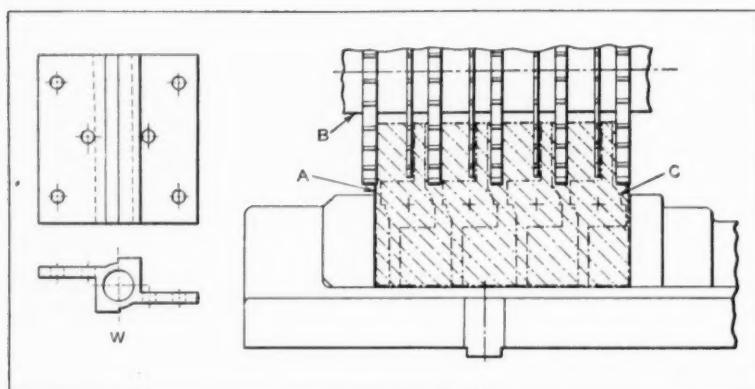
One of Sixteen Pieces *W* Machined from Bar of Steel *A* Shown in Milling Fixture Used for First Operation
